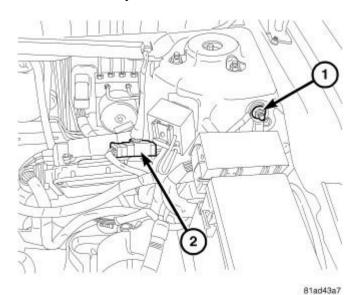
BATTERY CABLE Courtesy of CHRYSLER LLC
